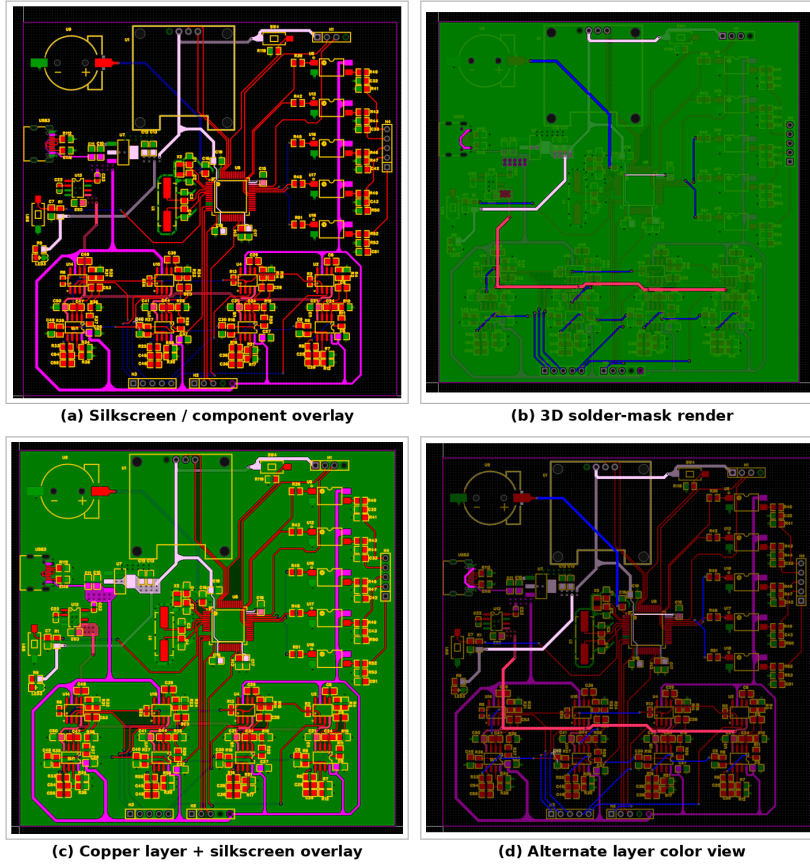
Controller PCB layout, four layout views from the design tool. (a) Silkscreen and component overlay on the routed board. (b) Solder-mask layer with signal routing. (c) Copper pour and silkscreen overlay. (d) Alternate layer colour assignment.
